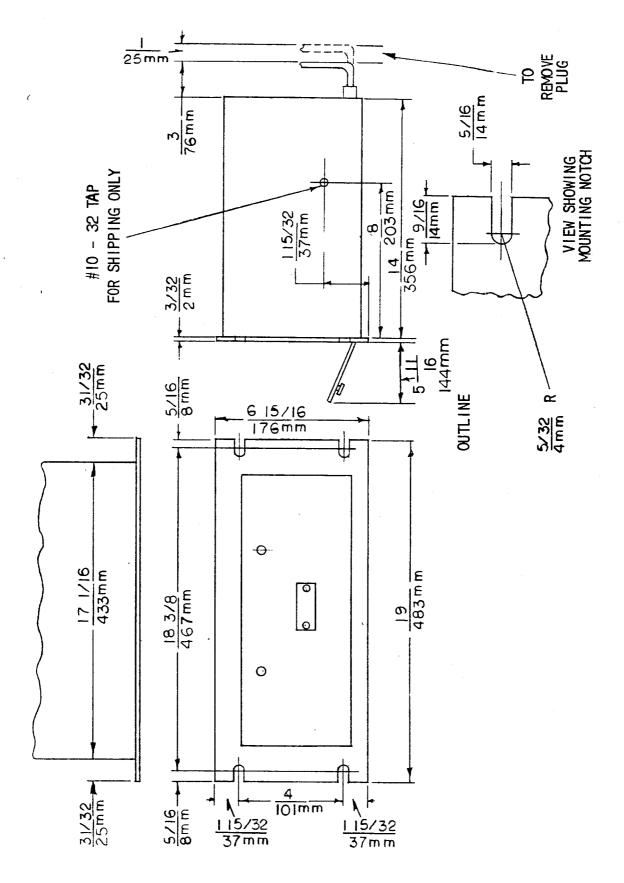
(0227A2037-0) Outline and Mounting Dimensions for the Type SLA52U Relay
